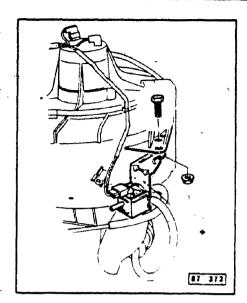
Two way valve (for fresh air/recirculation door), removing
